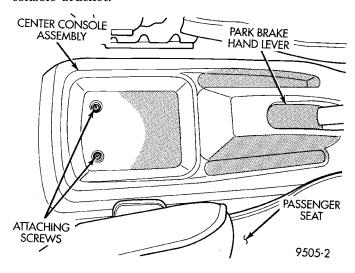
Attaching Screws At Rear Of Center Console With/Without Arm Rest
